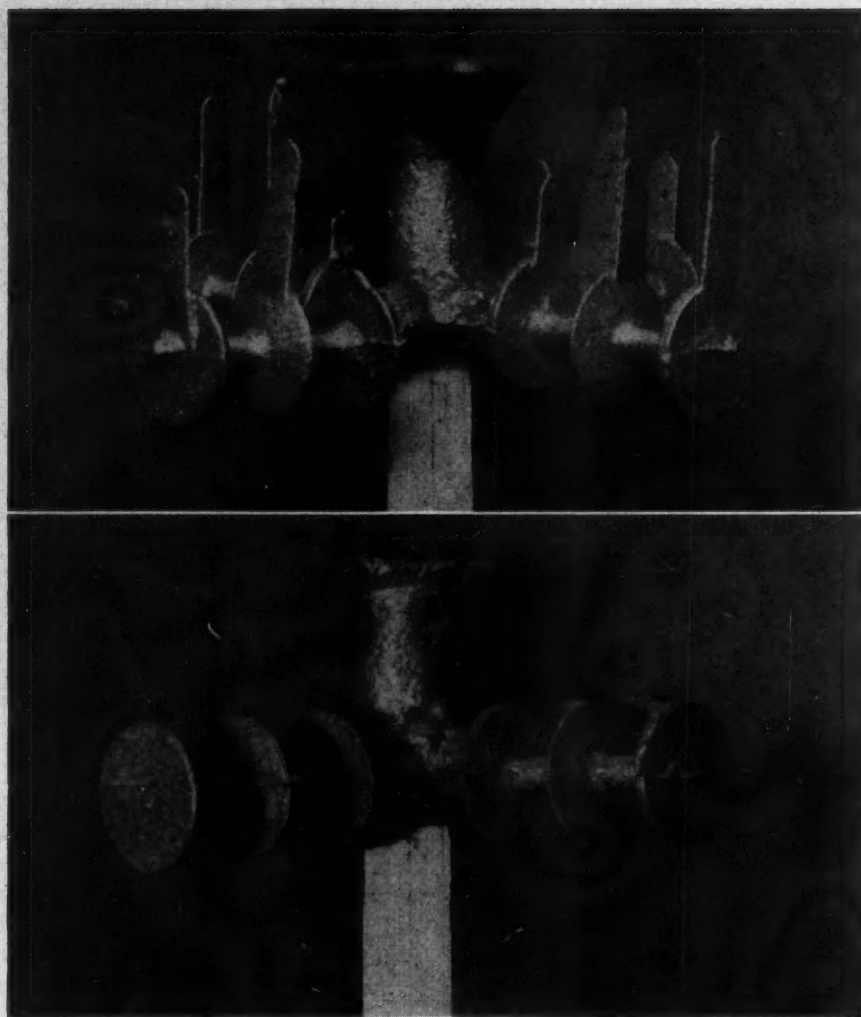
(top) Four chaplets provided with vents. Dimensions are: $2\frac{1}{2}$ -in. length provided with $1\frac{3}{4}$ -in. round heads at both ends, $\frac{3}{32}$ -in. section, disks at centers tapered from $\frac{3}{16}$ -in. section at stem to knife edge at outside to $1\frac{1}{2}$ -in. diameter. Fig. 5—(bottom) Four chaplets cast without vents in mold.
